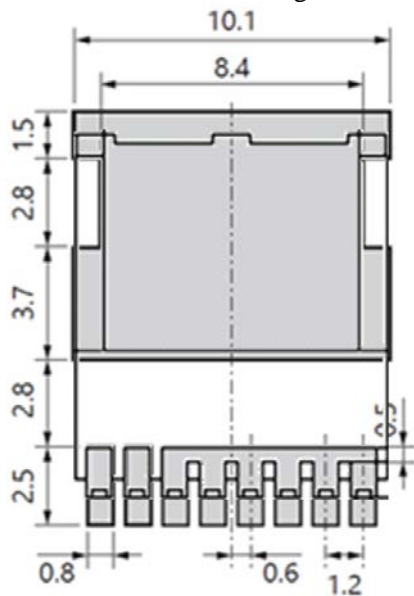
Reference Pad Dimensions + Our TOLL
